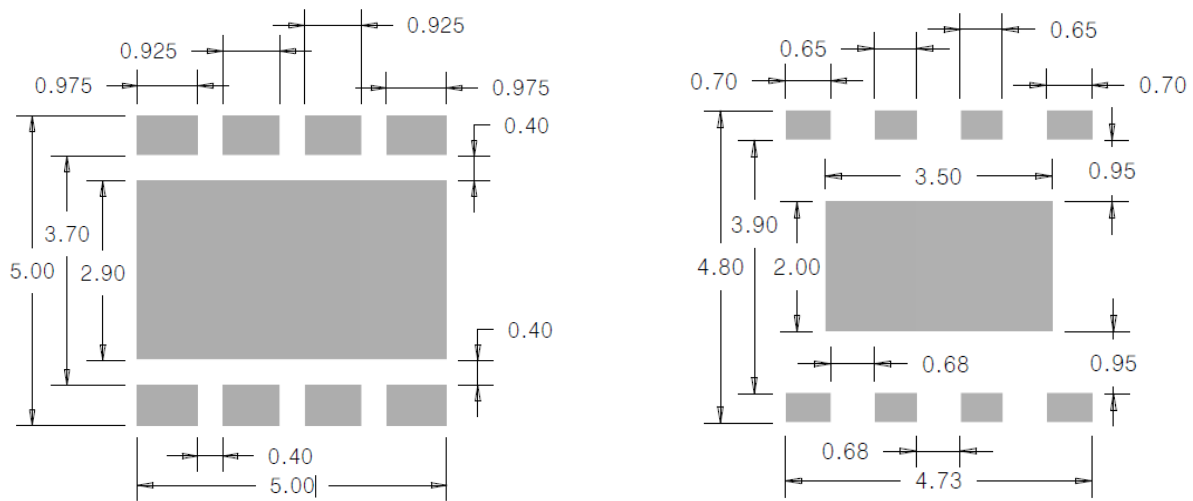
Recommended Solder Pad & Stencil Design (dimensions in mm)
